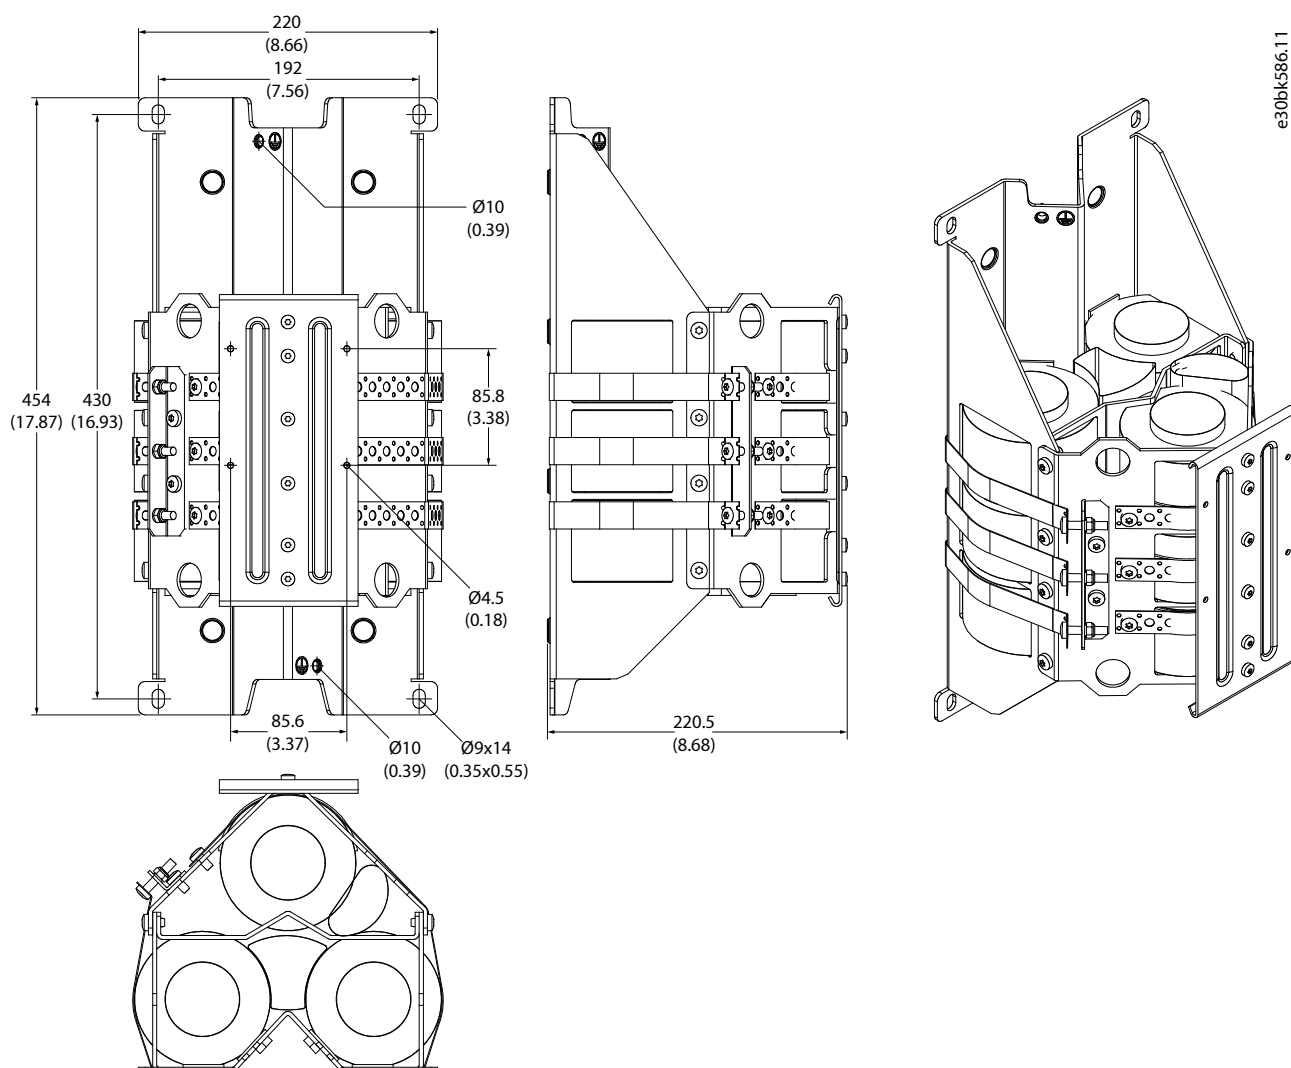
Dimensions of the dU/dt Filter 416/590 A Inductor in mm (in)
